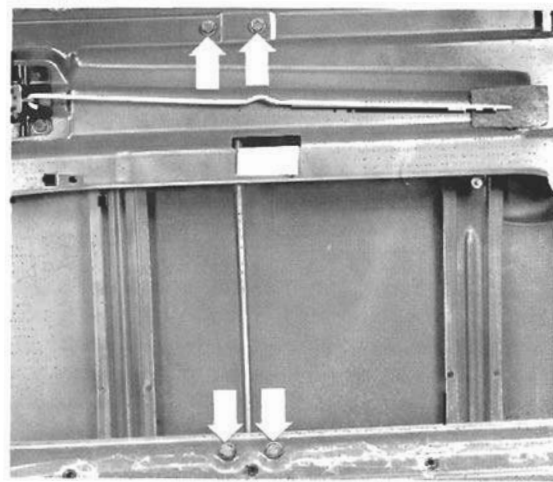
Bolts (arrows) that hold the window lifter assembly to the door panel.
